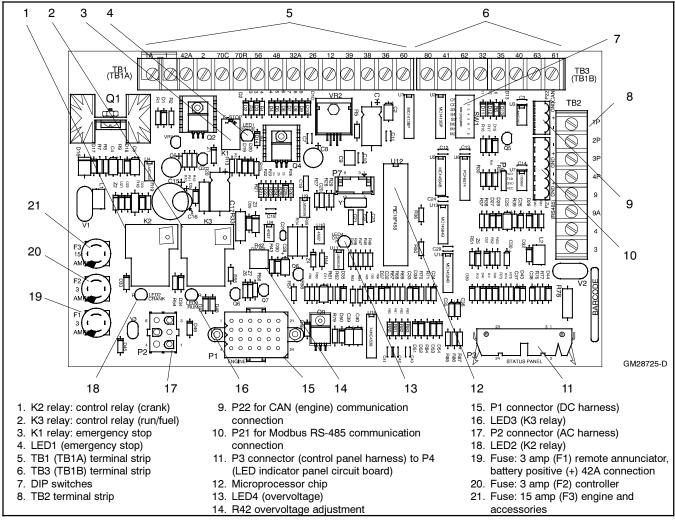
16-Light Controller Circuit Board GM28725 (Red Board) Components
